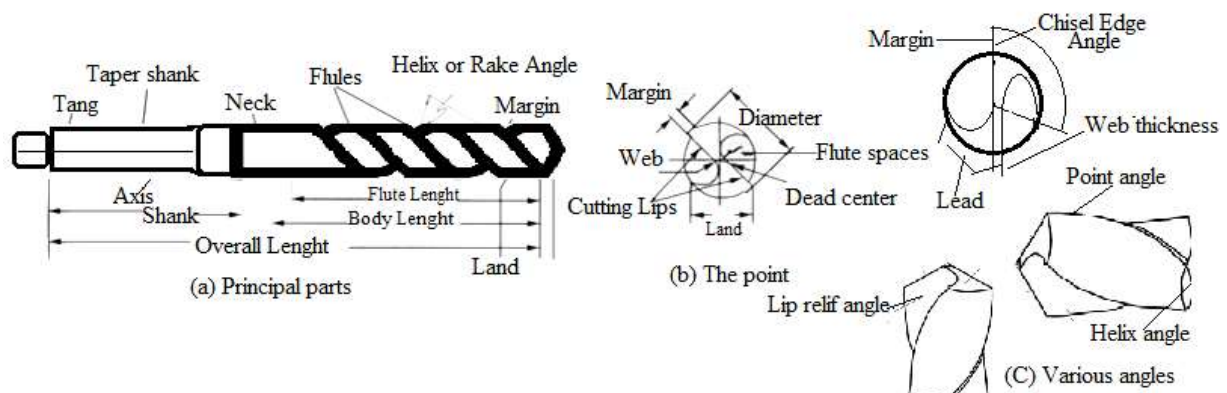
Nomenclature of a Drilling tool & details [13]
